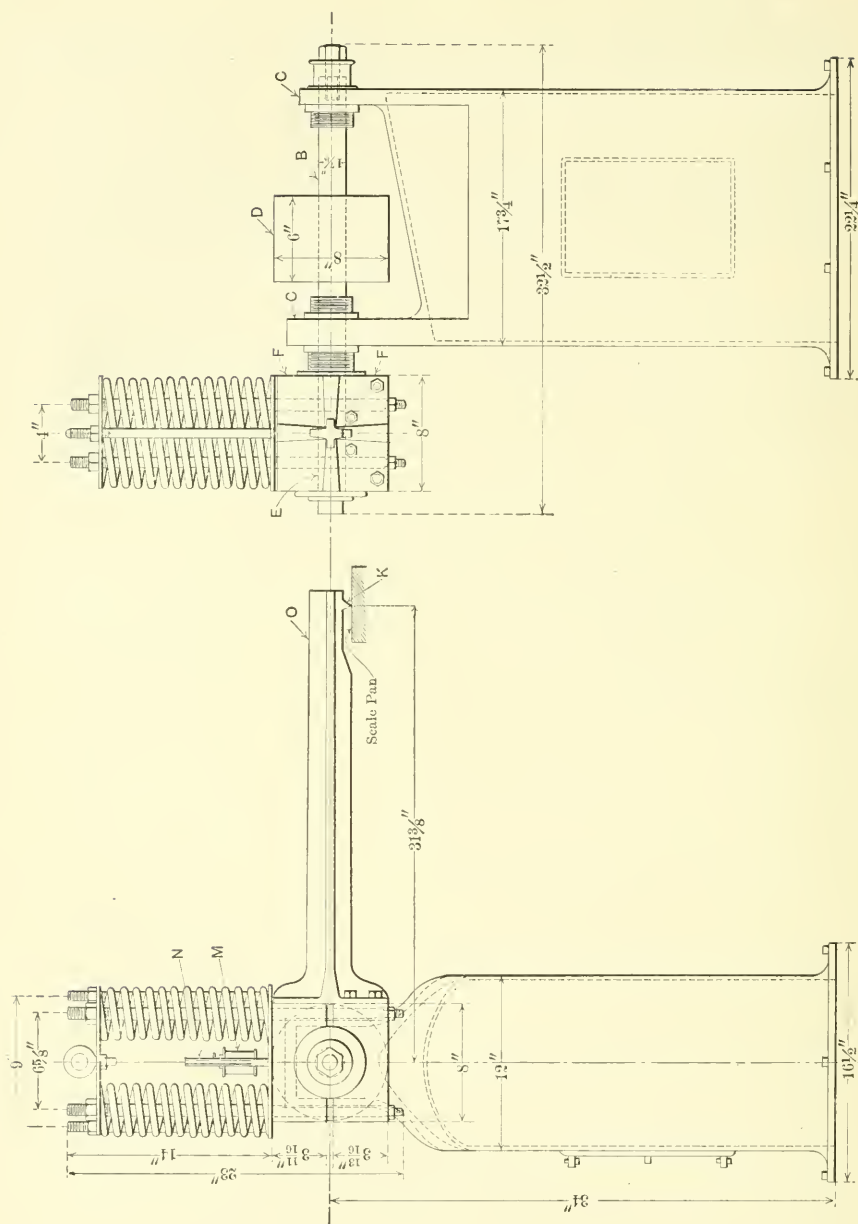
APPARATUS USED FOR TESTING THE EFFICIENCY OF LUBRICATING OIL
